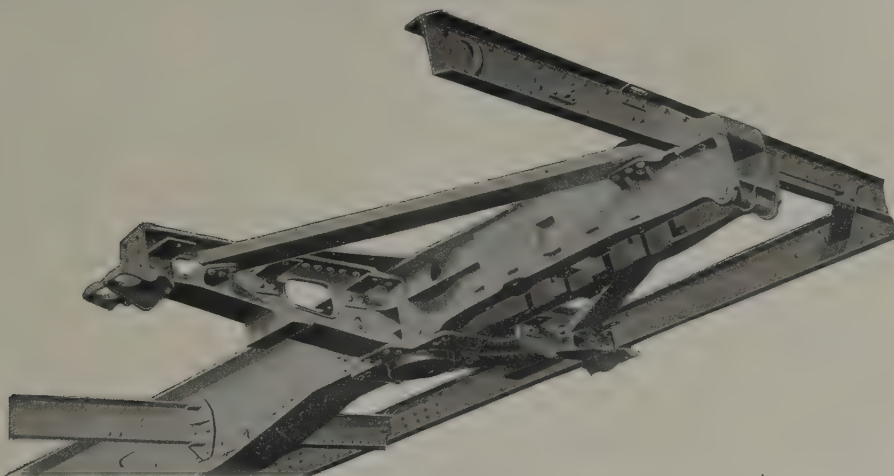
End Construction of Bettendorf Single Center Sill Underframe, Showing Arrangements for Draft Gear. The Bettendorf Company.
